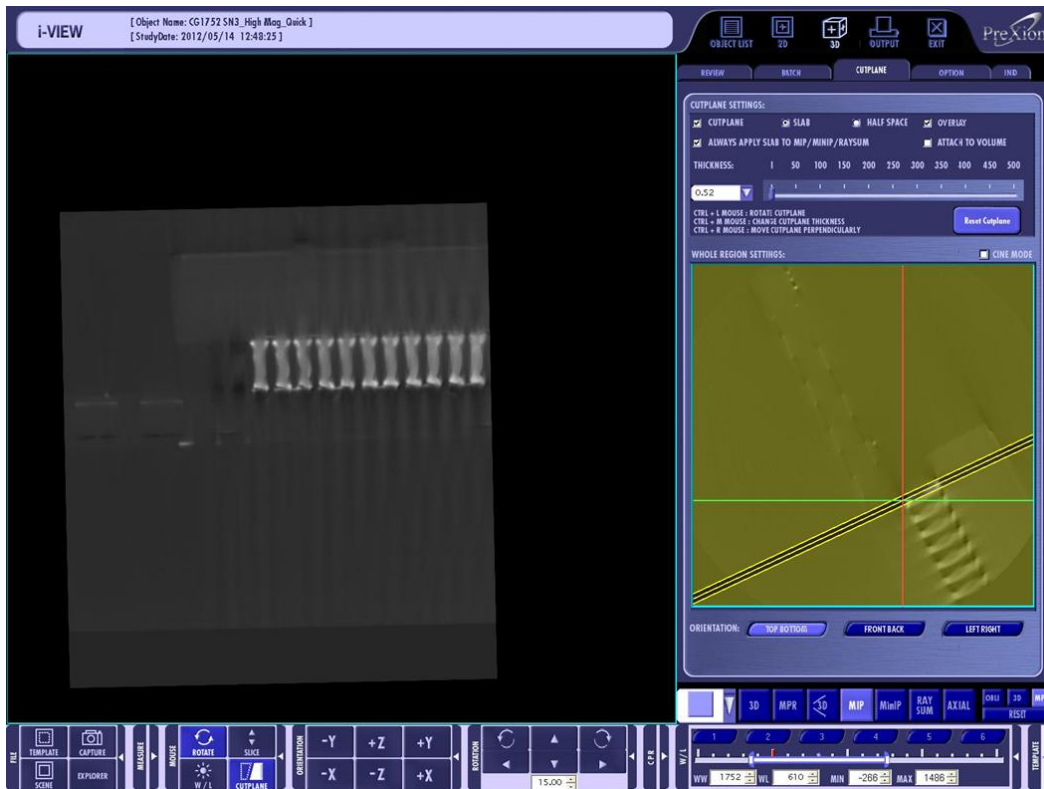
Higher magnification of 3D X-ray photographs of a CGA1752 assembly.
